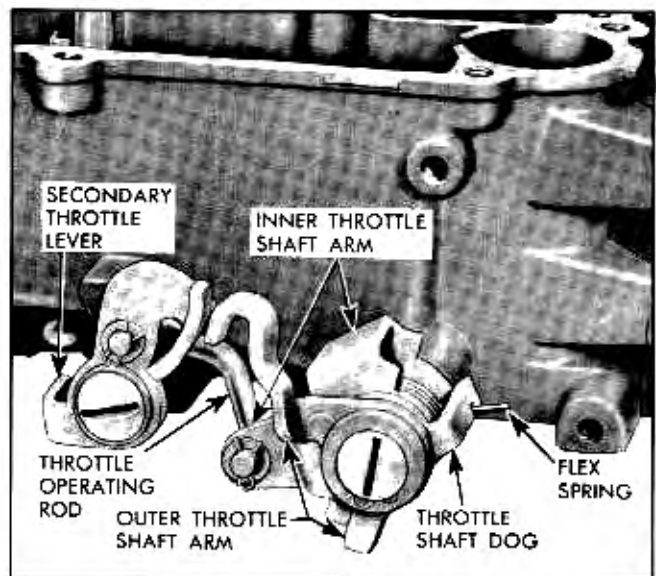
B-87 Primary and Secondary Throttle Linkage Installed
